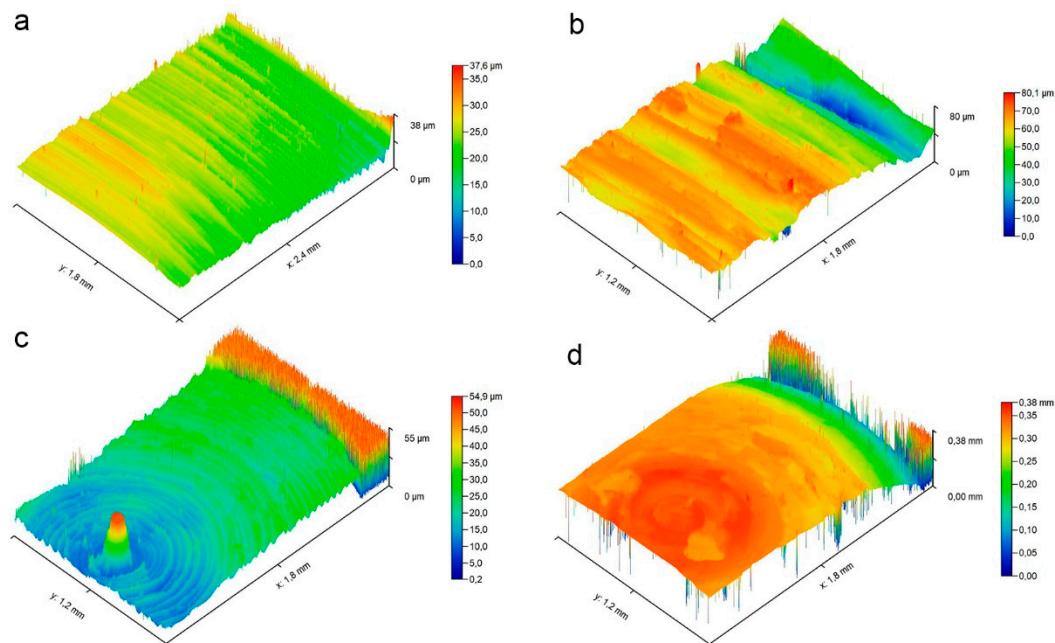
General view of the tool before friction stir processing (FSP) (a), after traversing 1105 mm (b), 2335 mm (c), and 2755 mm (d).
